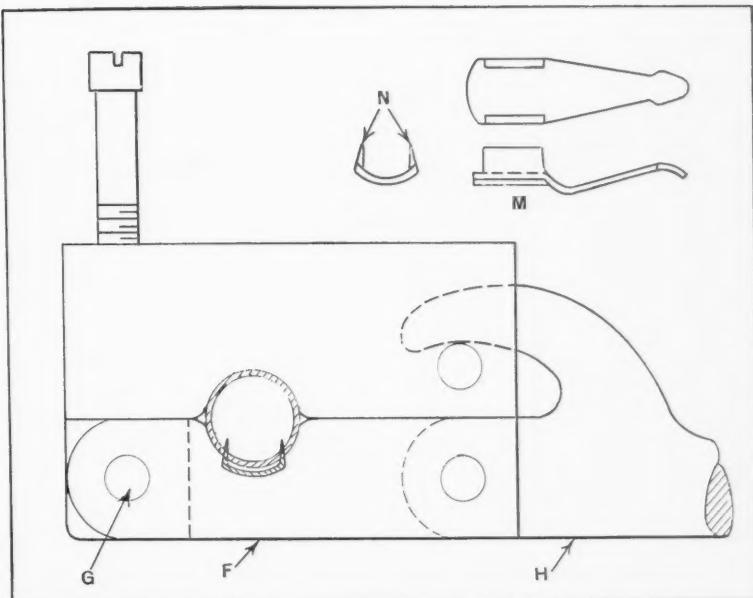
Fixture for Holding Pencil Clips Assembled in Hand Press
